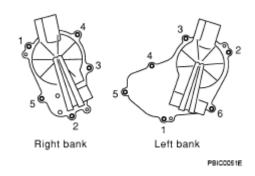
Identifying Intake Valve Timing Control Cover Mounting Bolts Loosening Sequence
